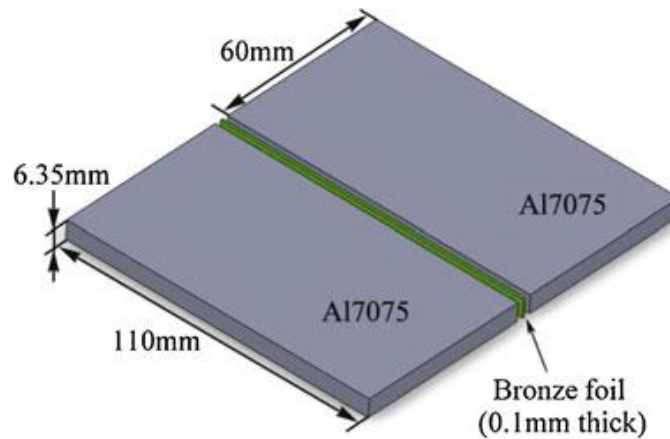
Schematic diagram showing the inserting a bronze foil between the workpieces. ([Li et al., 2013](#))
